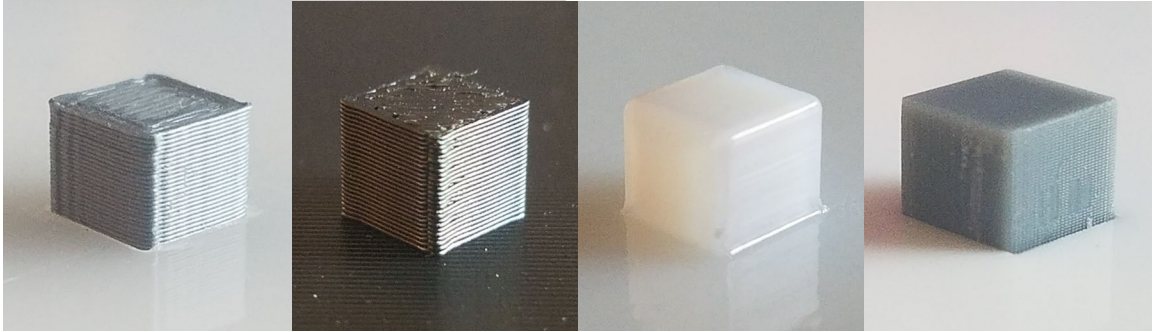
Detail of the surface finish of the 5mm square shape fabricated using four different printing technologies. (L-R) STi2 FDM precedent, FDM sample, Polyjet sample, Carbon 3D resin print - put into production.
